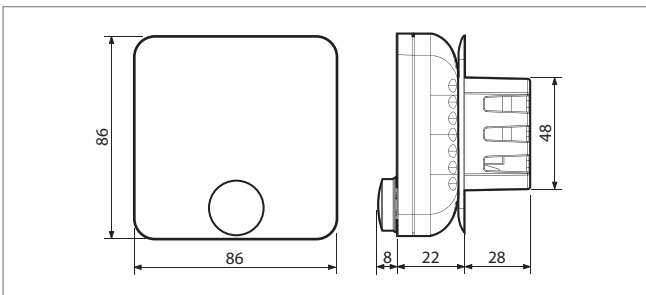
Dimensional drawing for the zone operator terminal for flush mounting (dimensions in mm)
